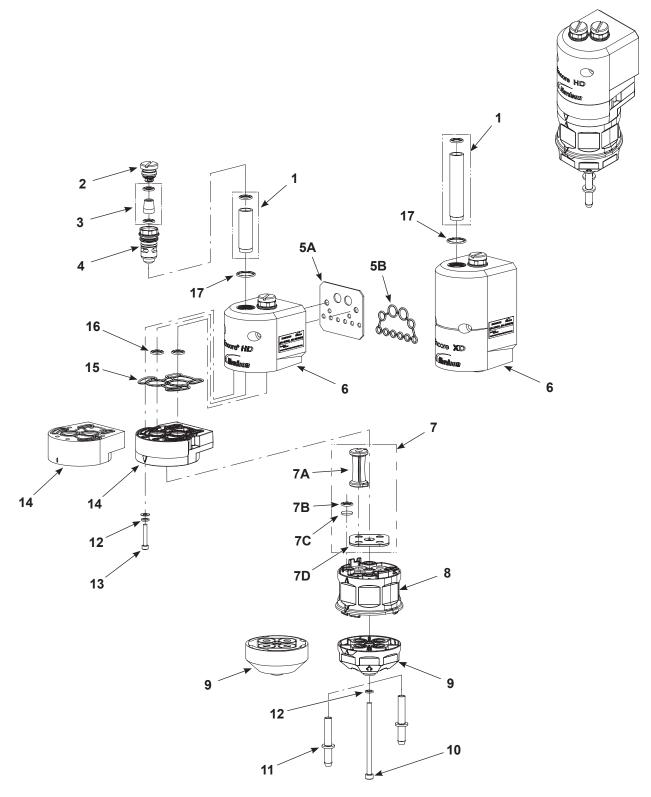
Encore HD, HD+ and XD Standard Parts
